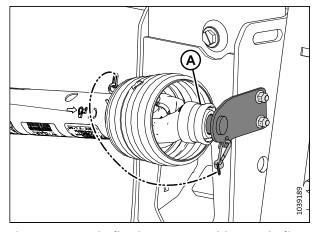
Driveline in Storage Position – Driveline B7038 or B7039
